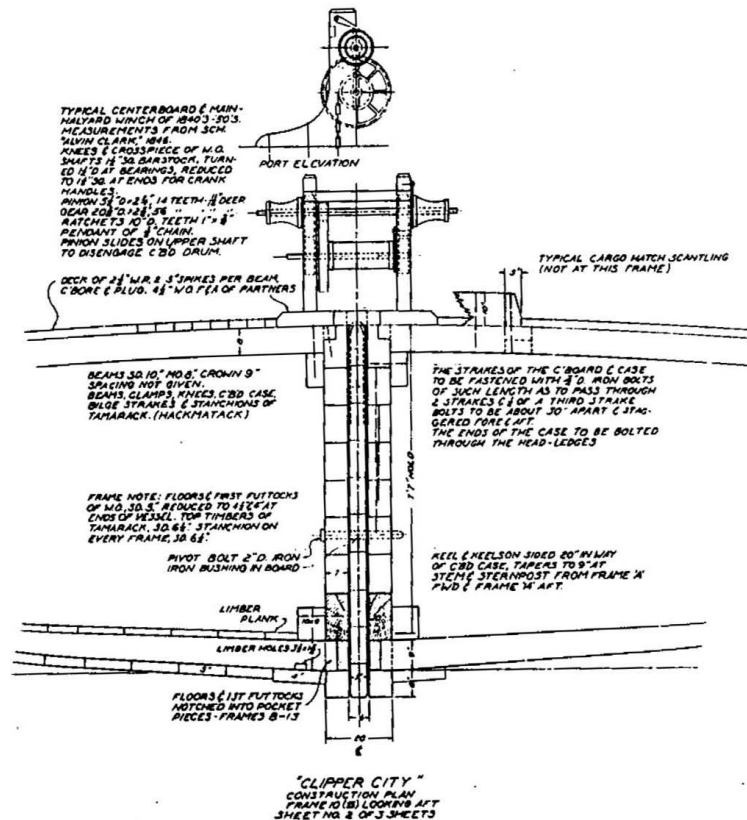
Centreboard Construction Plan for Clipper City (Barkhausen 1990:12).
